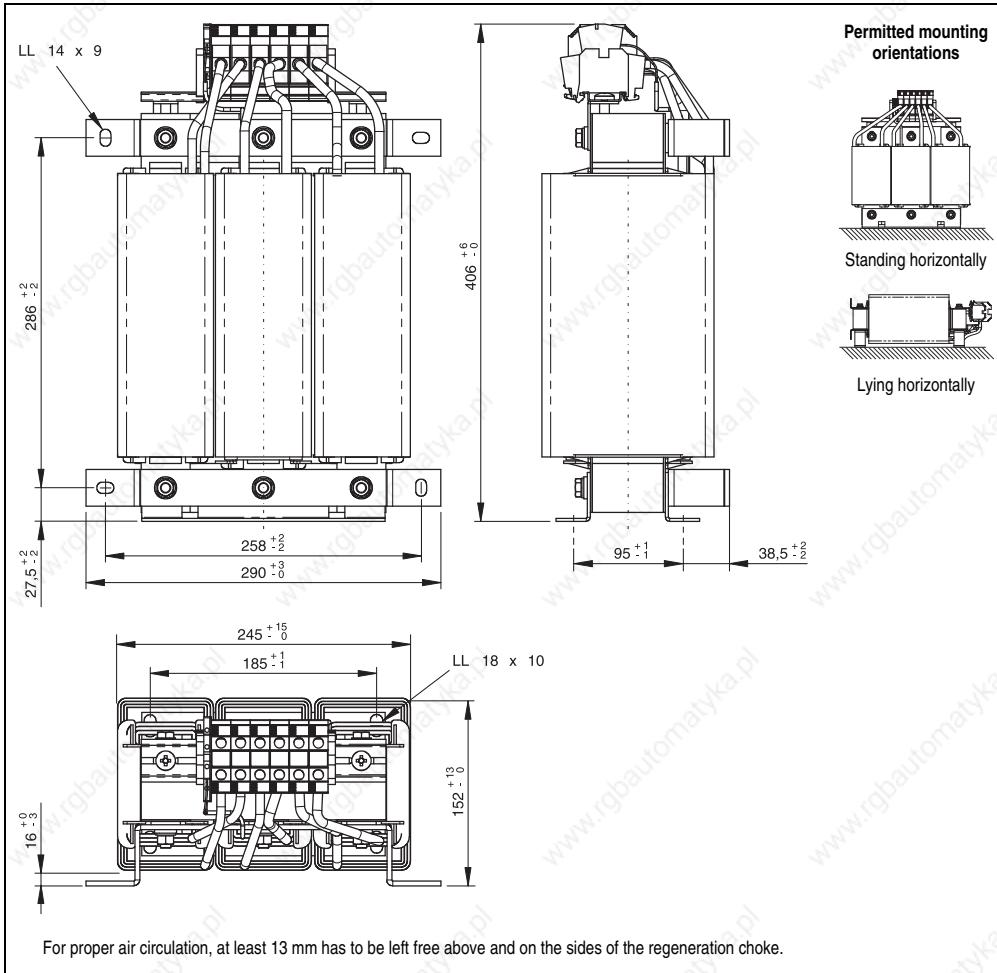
Dimension diagram and installation dimensions for 8BVR0880H000.100-1
